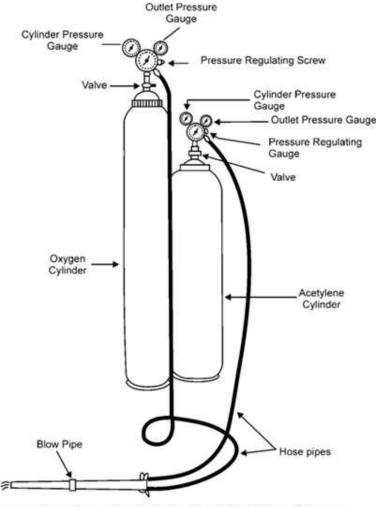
A: Oxy- Acetylene Gas Welding Set Up
